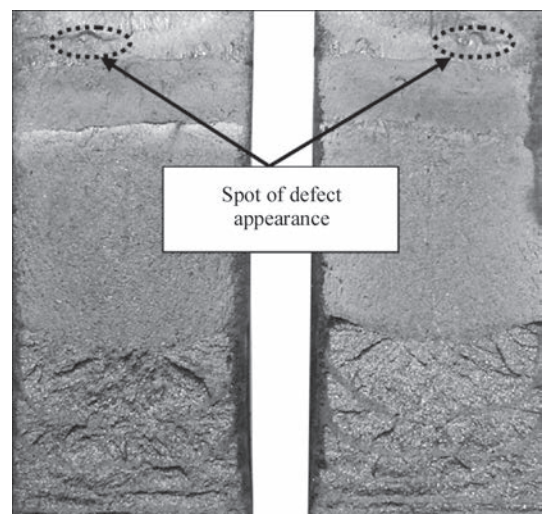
Appearance of fracture surface of the specimen No.10 with a defect along the fusion boundary between the individual layers of the deposited metal, from which fatigue crack was formed
